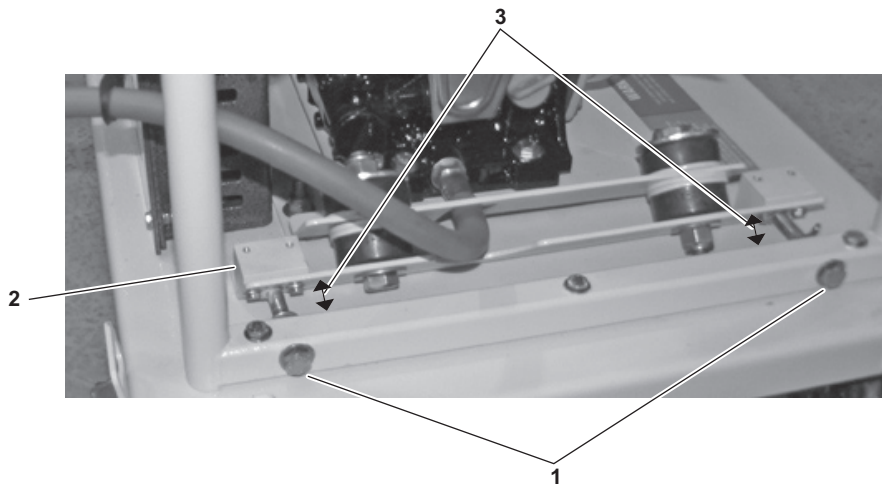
Jacking Bolts of the Tensioning Assembly
